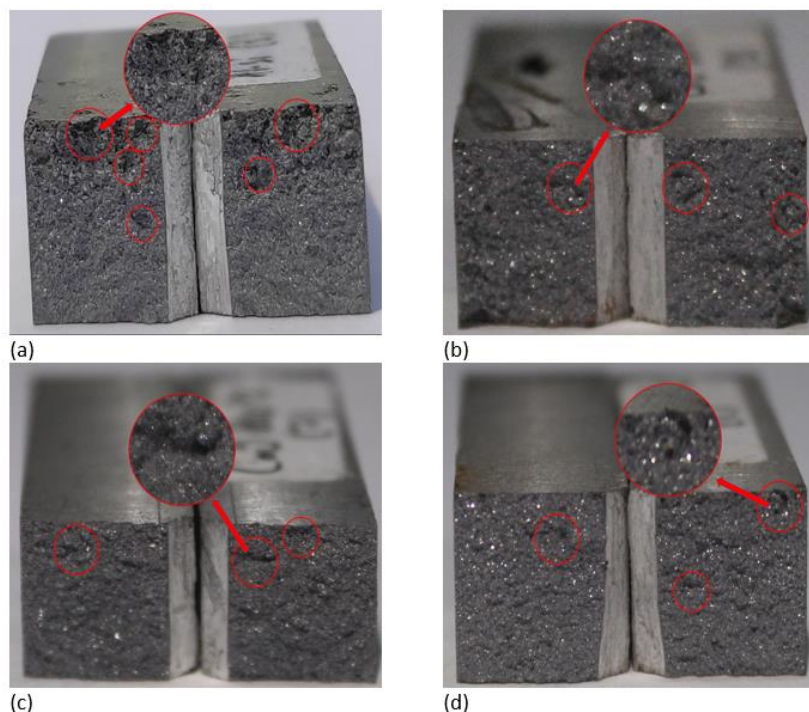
Fracture surface morphologies of: a) Al-Si; b) Al-Si/0.015% CoO at 750°C T_m ; c) Al-Si/0.015% CoO at 800°C T_m ; d) Al-Si/0.015% CoO at 850°C T_m
